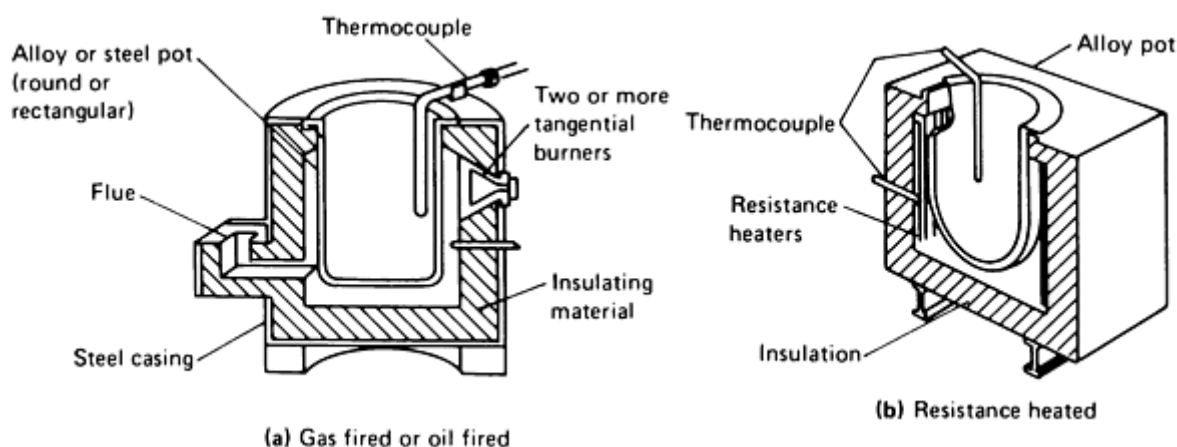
Externally heated salt bath furnaces for liquid carburizing
